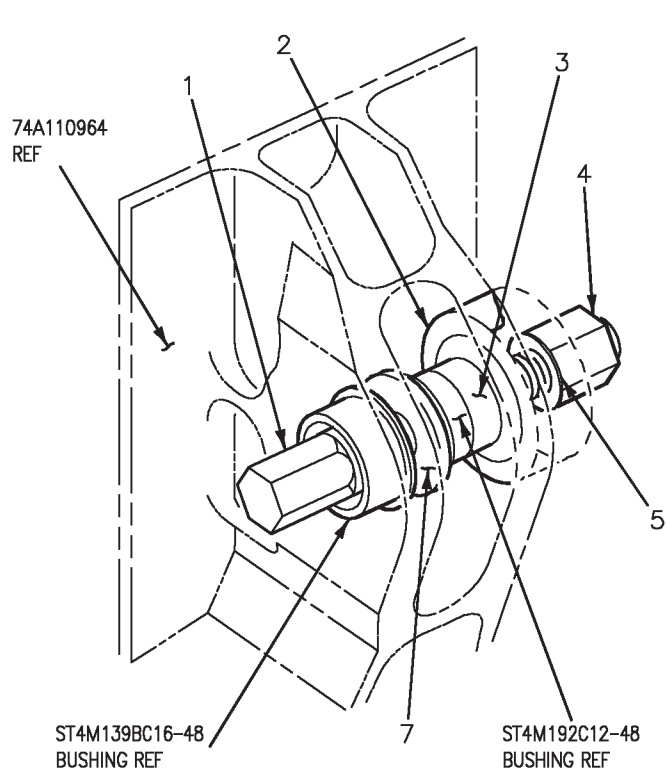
Bushing Removal, Installation, and Reaming (Sheet 1)
